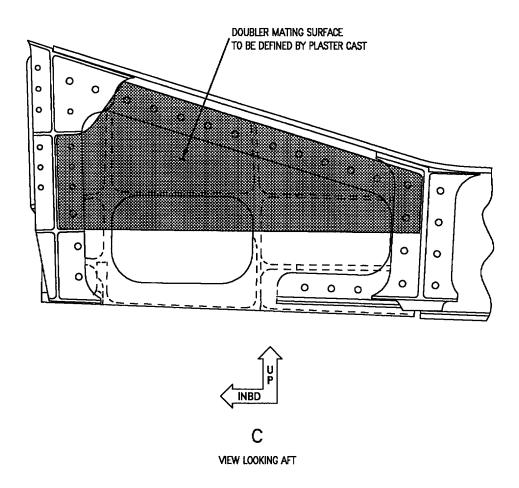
Repair of Damage to 74A110959 Hinge Half Caused By Trailing Edge Flap Actuator (Sheet 3)
